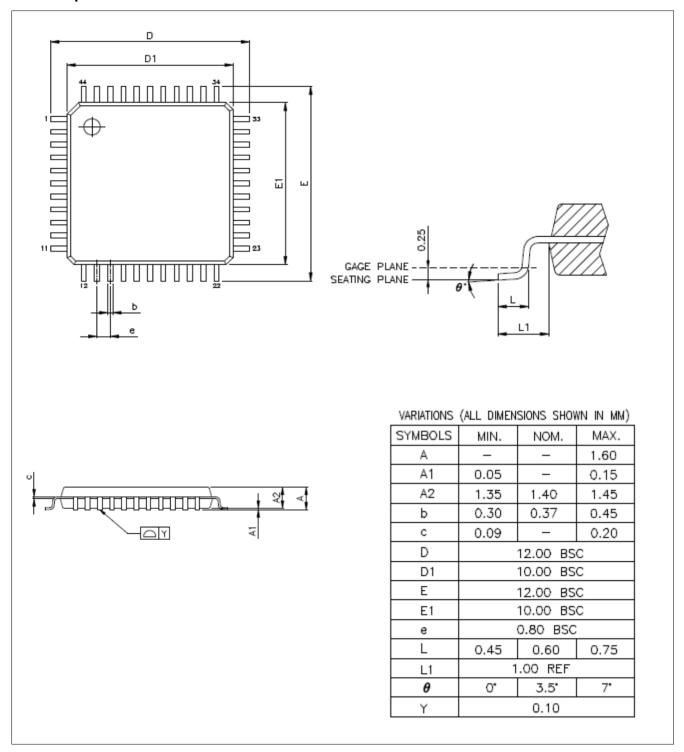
LFP44 (10x10x1.4 mm, Footprint 2.0 mm) Package Dimension
